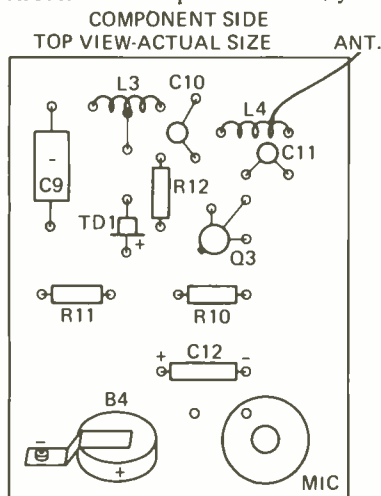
WIRELESS MICROPHONE PC PATTERN and parts layout shown full-size. A similar layout using perforated board will work if you keep the rf circuit leads short.
